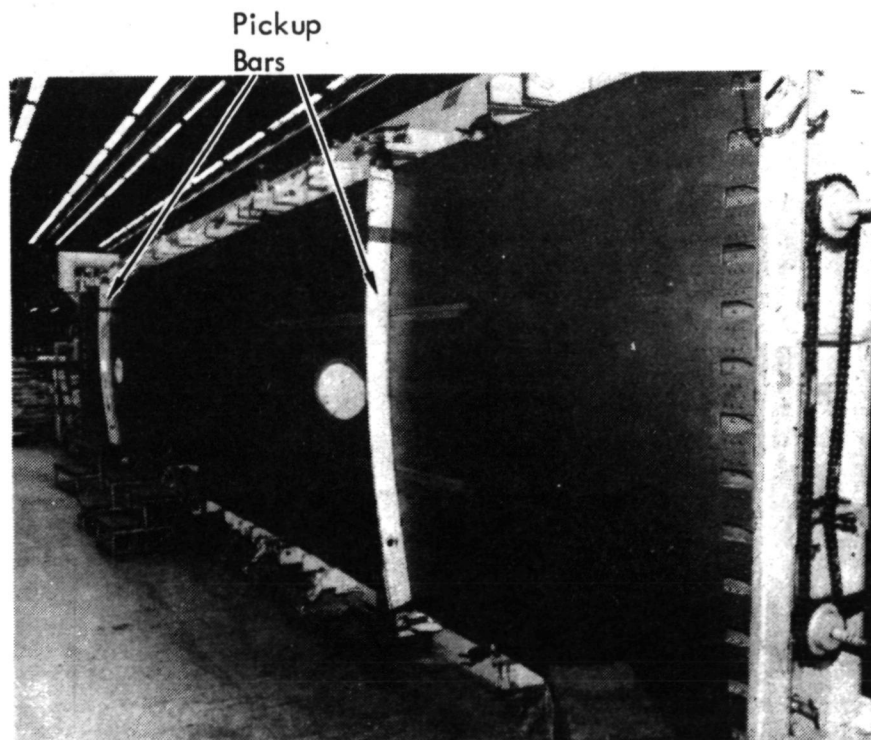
LOWER SURFACE IN FIRST-STAGE ASSEMBLY FIXTURE
